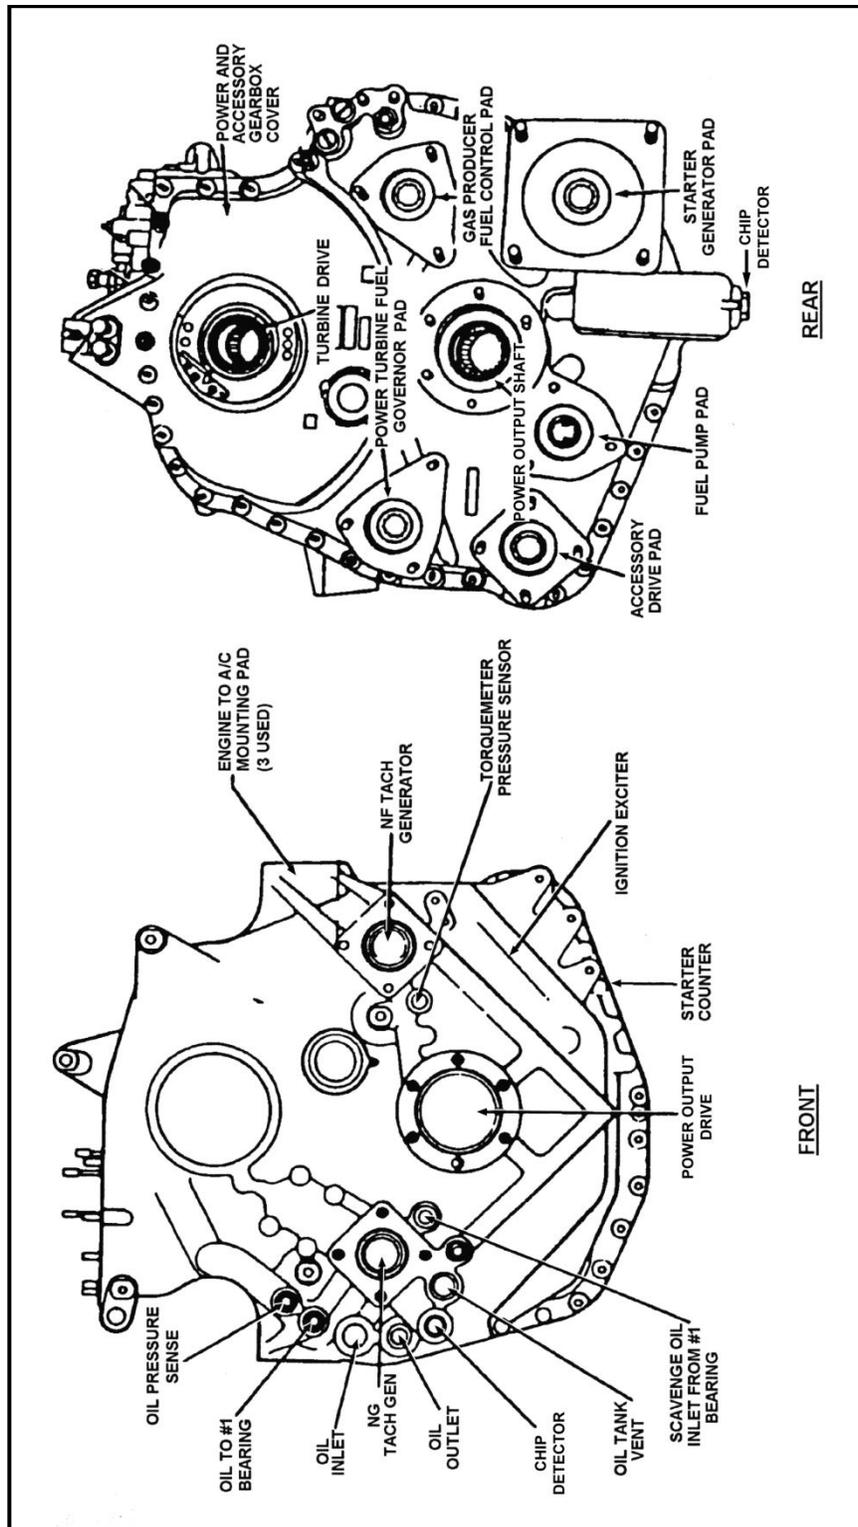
Accessory Gearbox Mounting Pad Locations
